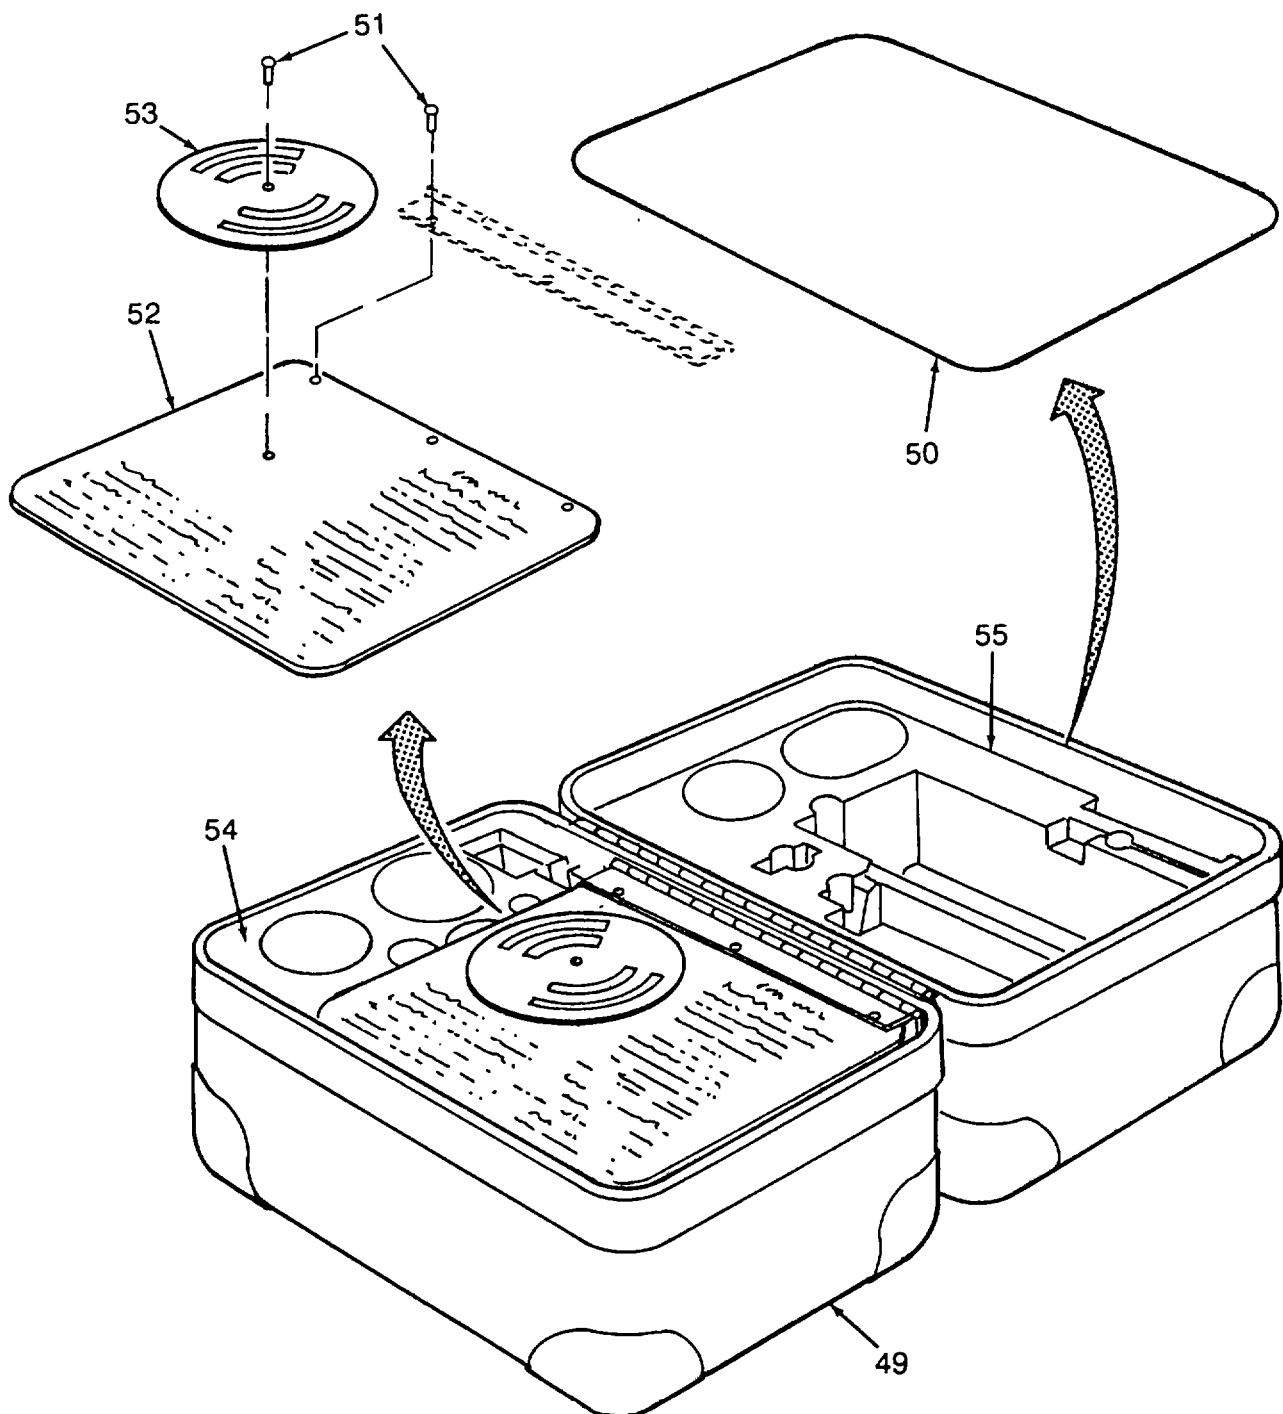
Petroleum Test Kit (Sheet 5 of 5)
